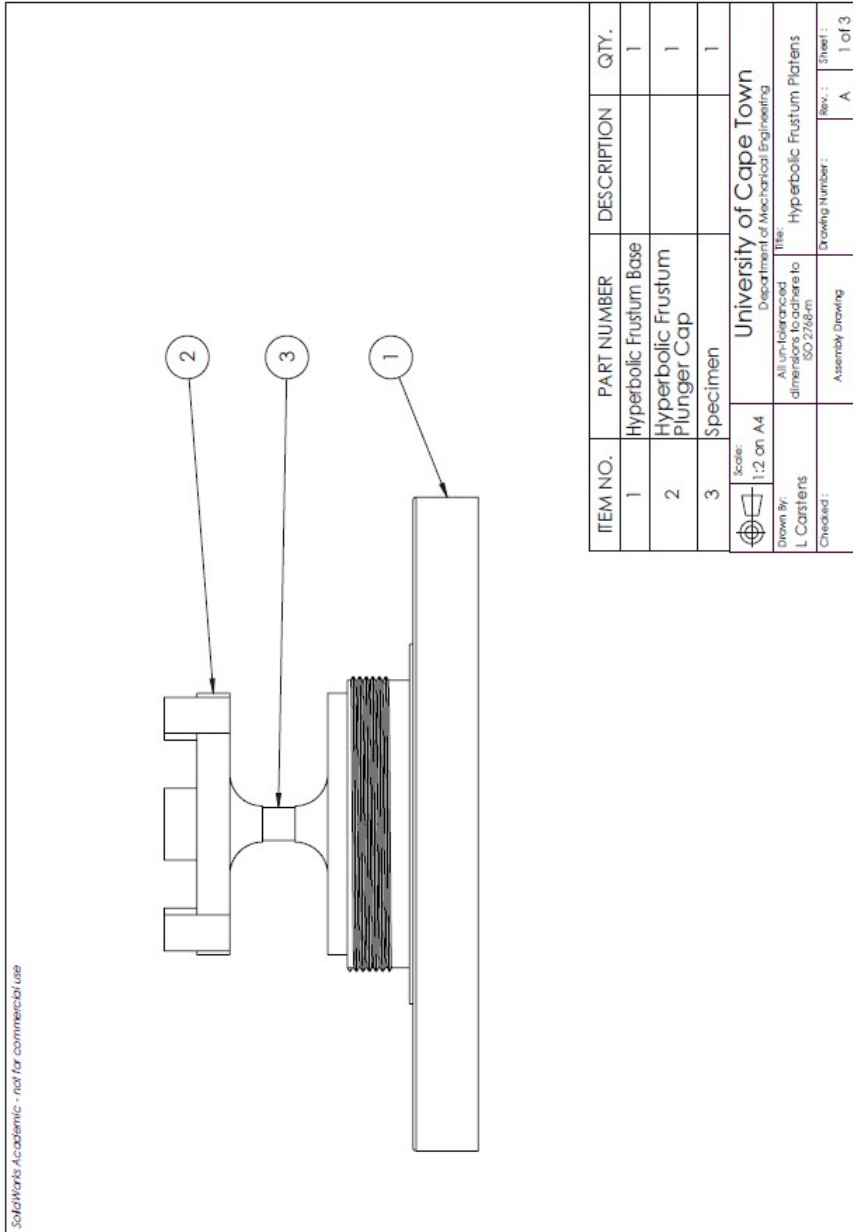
Assembly drawing for the hyperbolic frustum platens.
